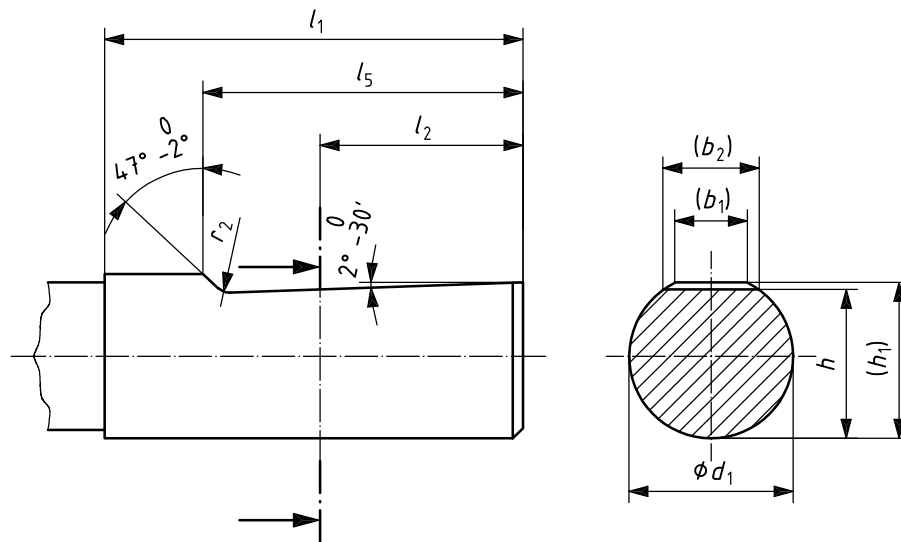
WN form — Flatted cylindrical shanks with inclined clamping surface
